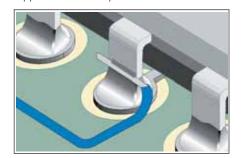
Not Recommended* Soldered perpendicular to component lead.
